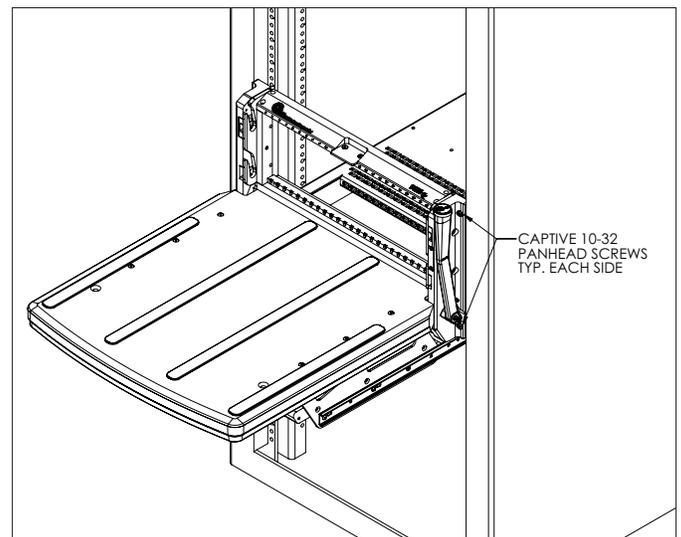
Figure F. Secure the receiver to the rack with the captive 10-32 screws, taking care to lift up on the platform slightly to ensure even engagement.
